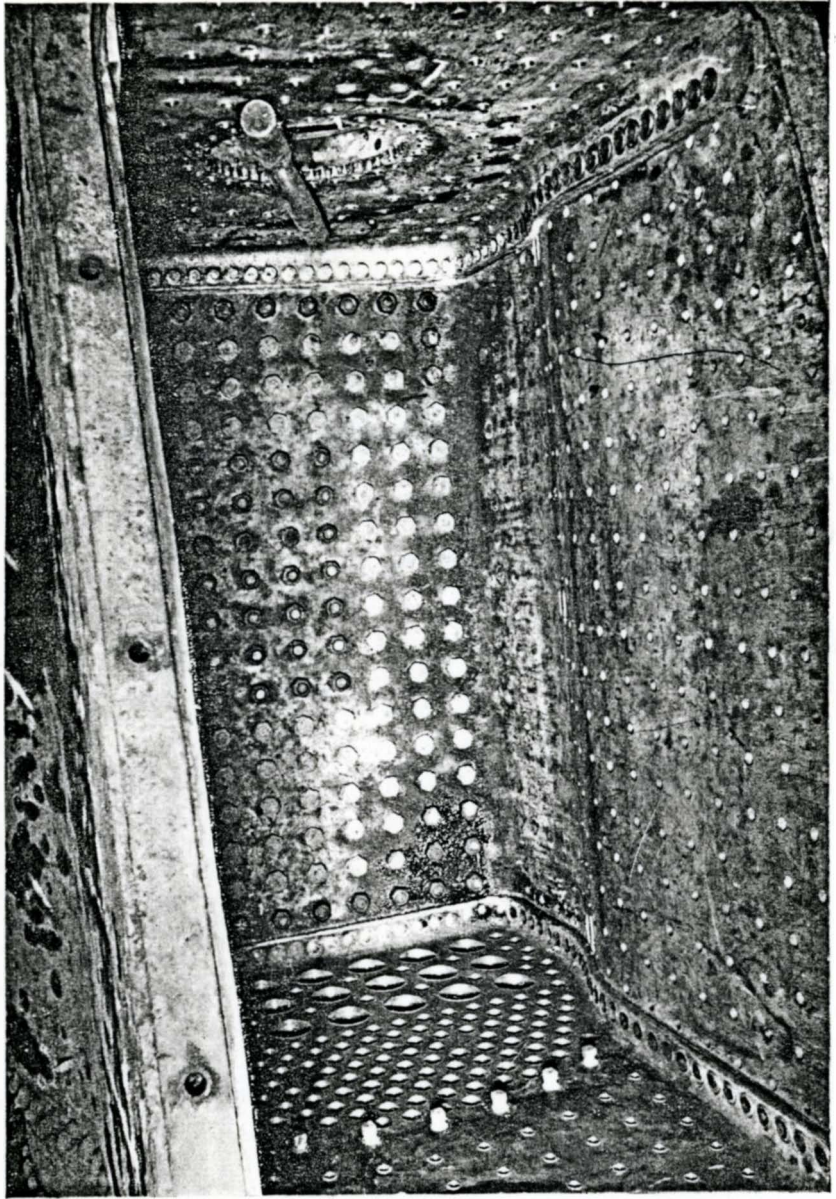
Locomotive firebox. New three-quarter wrapper side-plates having been welded into position, the repair is completed by fitting a new tube plate and a new door plate. (By courtesy of the Railway Executive.)
